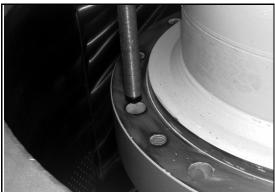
Install the All-thread in Cylinder Flange Mounting Holes
